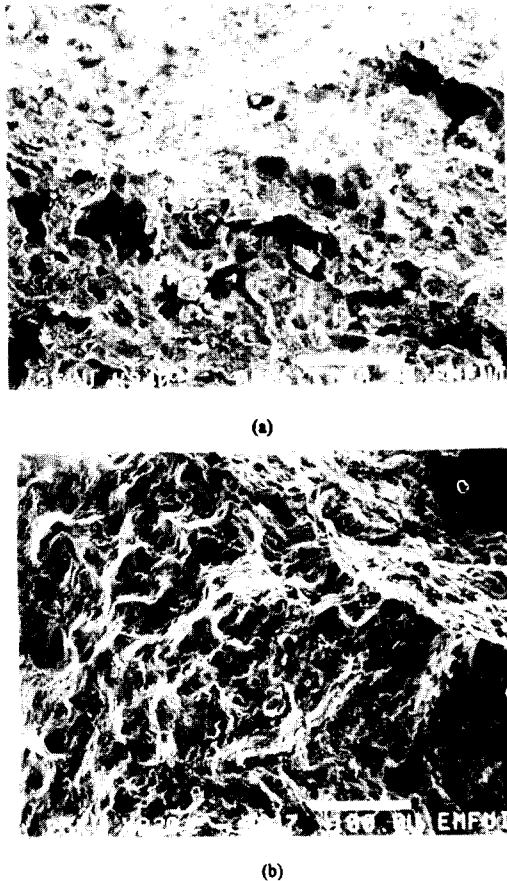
Scanning electron micrographs obtained fracture surface of (a) SAW and (b) 78kJ/in heat input TIG weld
